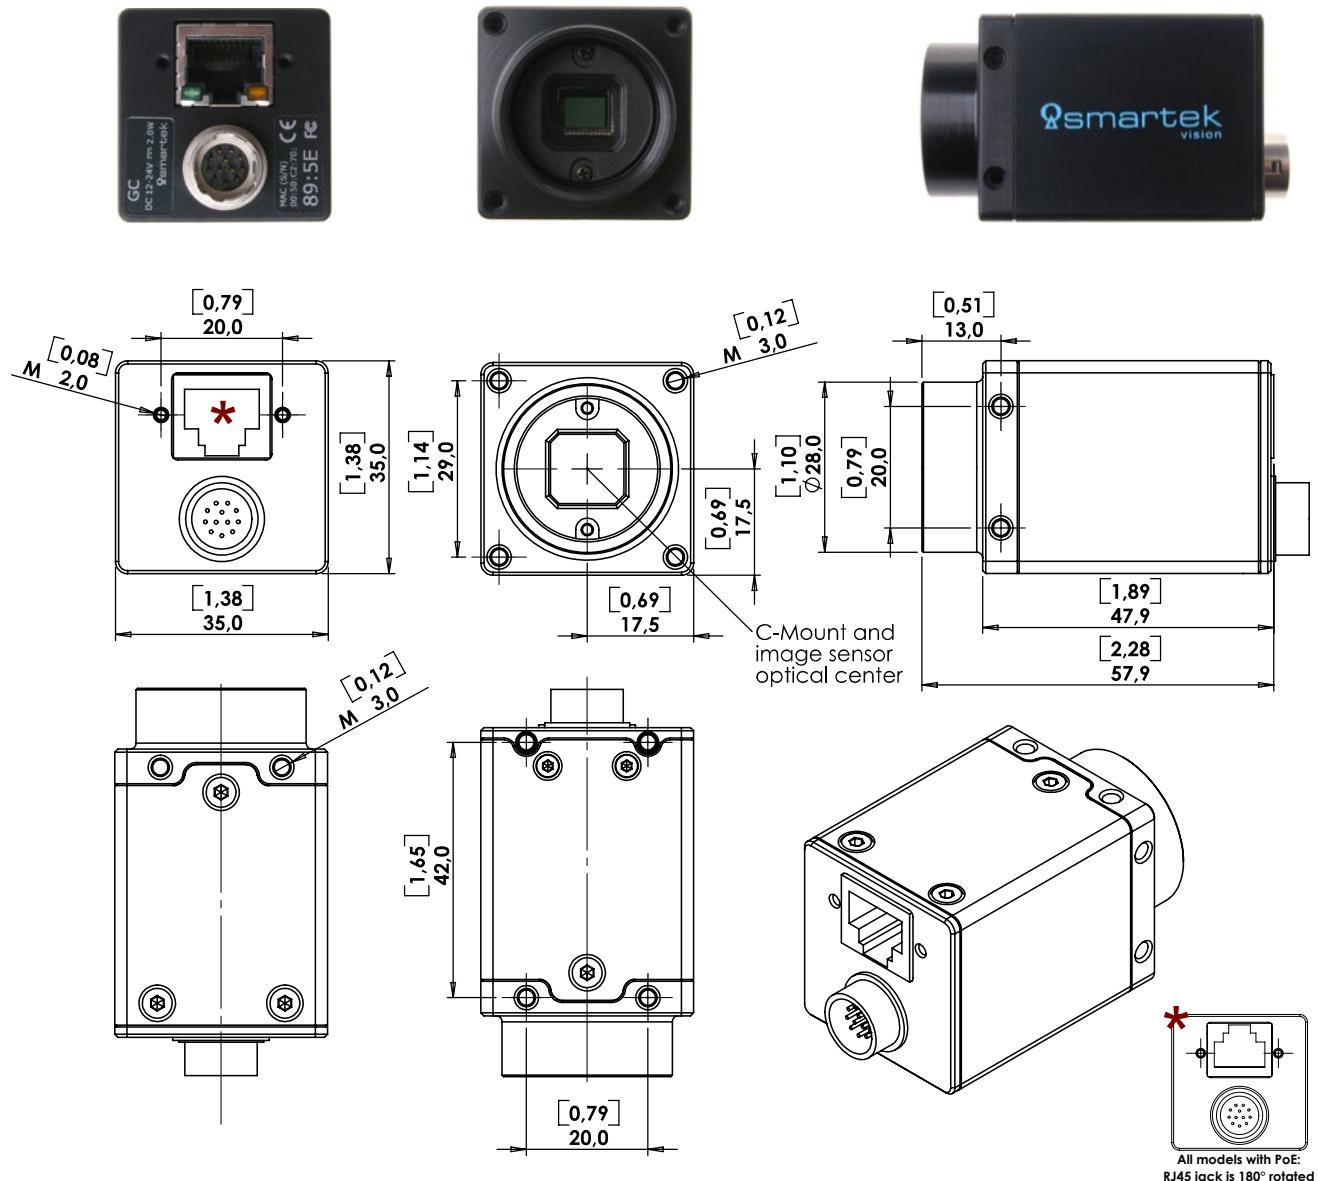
Technical measures of standard camera housing (all dimensions are in mm [inch])
